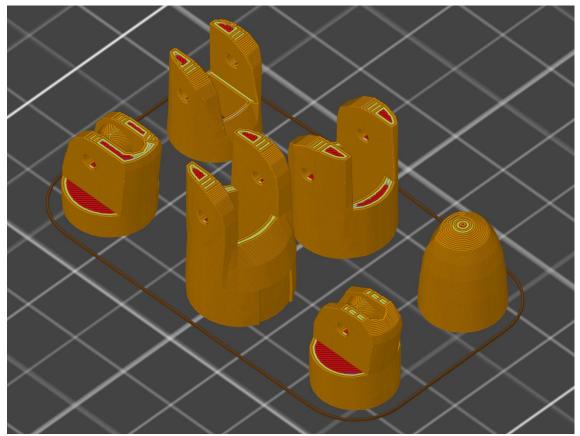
InMoov ring finger, sliced, showing assembly parts.
